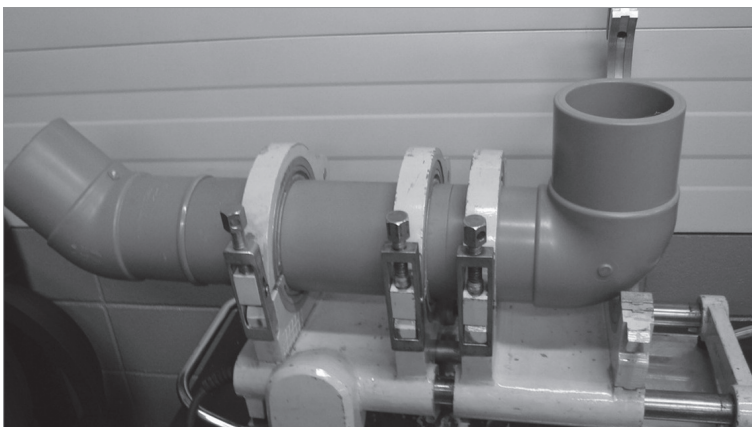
The spigots of the fittings have to be planed by a suitable electrical planing tool. Ensure that the spigots of the fittings are always planed before every welding.
